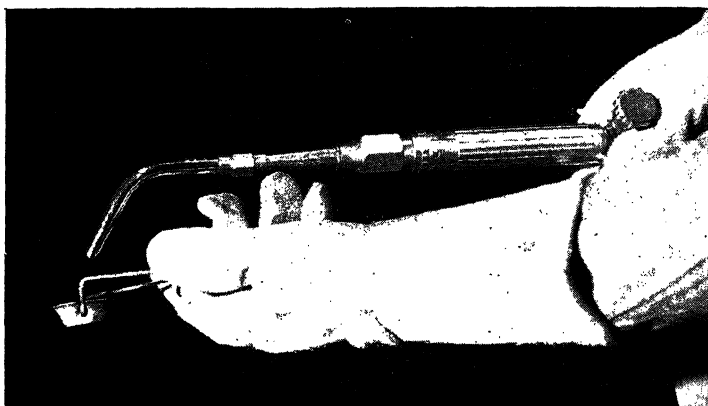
Lighting torch. (*Courtesy of Linde Air Products Co.*)
